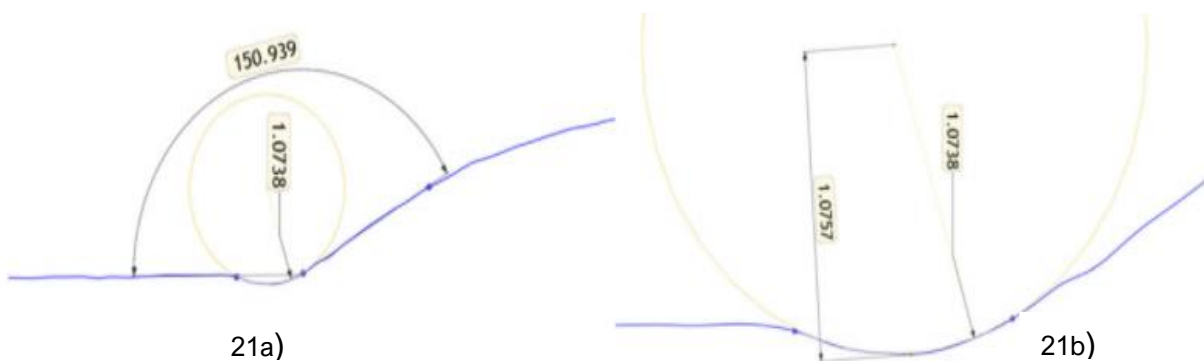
Weld toe radius and flank angle determination. 21a) Circle fitting for toe radius. 21b) Tangent lines fitting for flank angle. [27]
